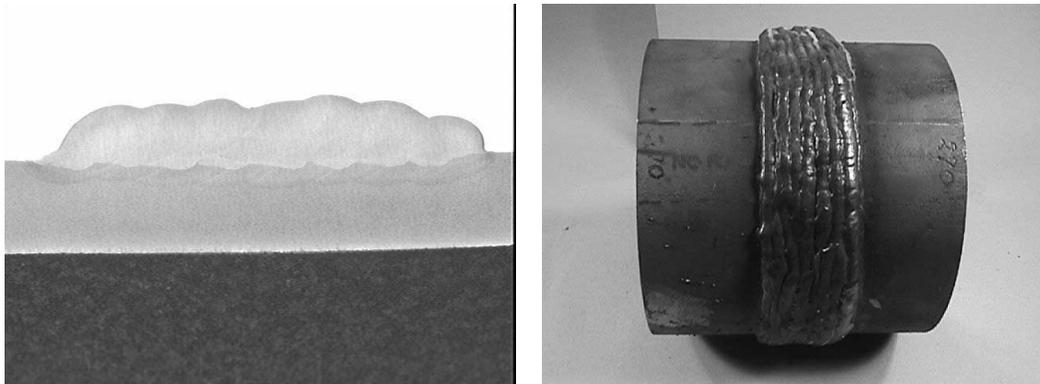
Overlay weld specimen with the manual FCAW process.
